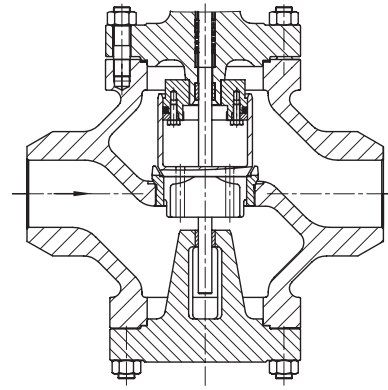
· Type 3254 Globe Valve with welding ends and balanced valve plug
